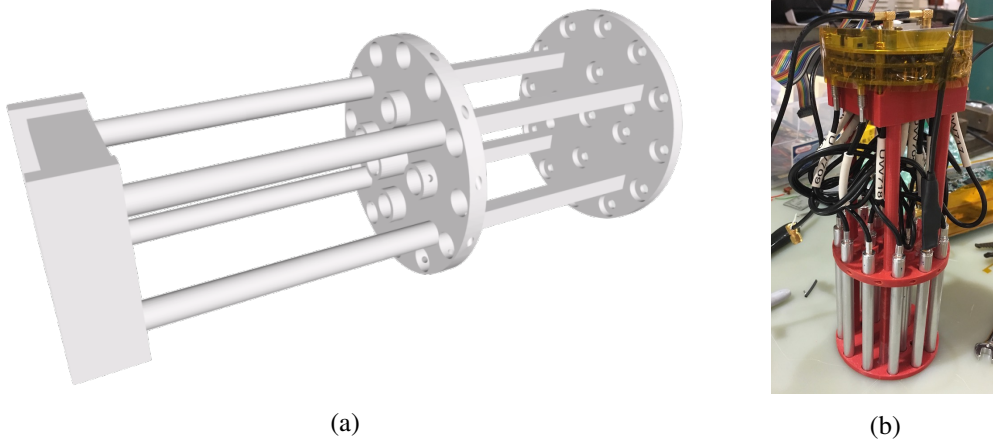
(a) The design drawing of the new 3D-printed probe holder. (b) The new 3D-printed probe holder with the 17 NMR probes and the multiplexer mounted.
